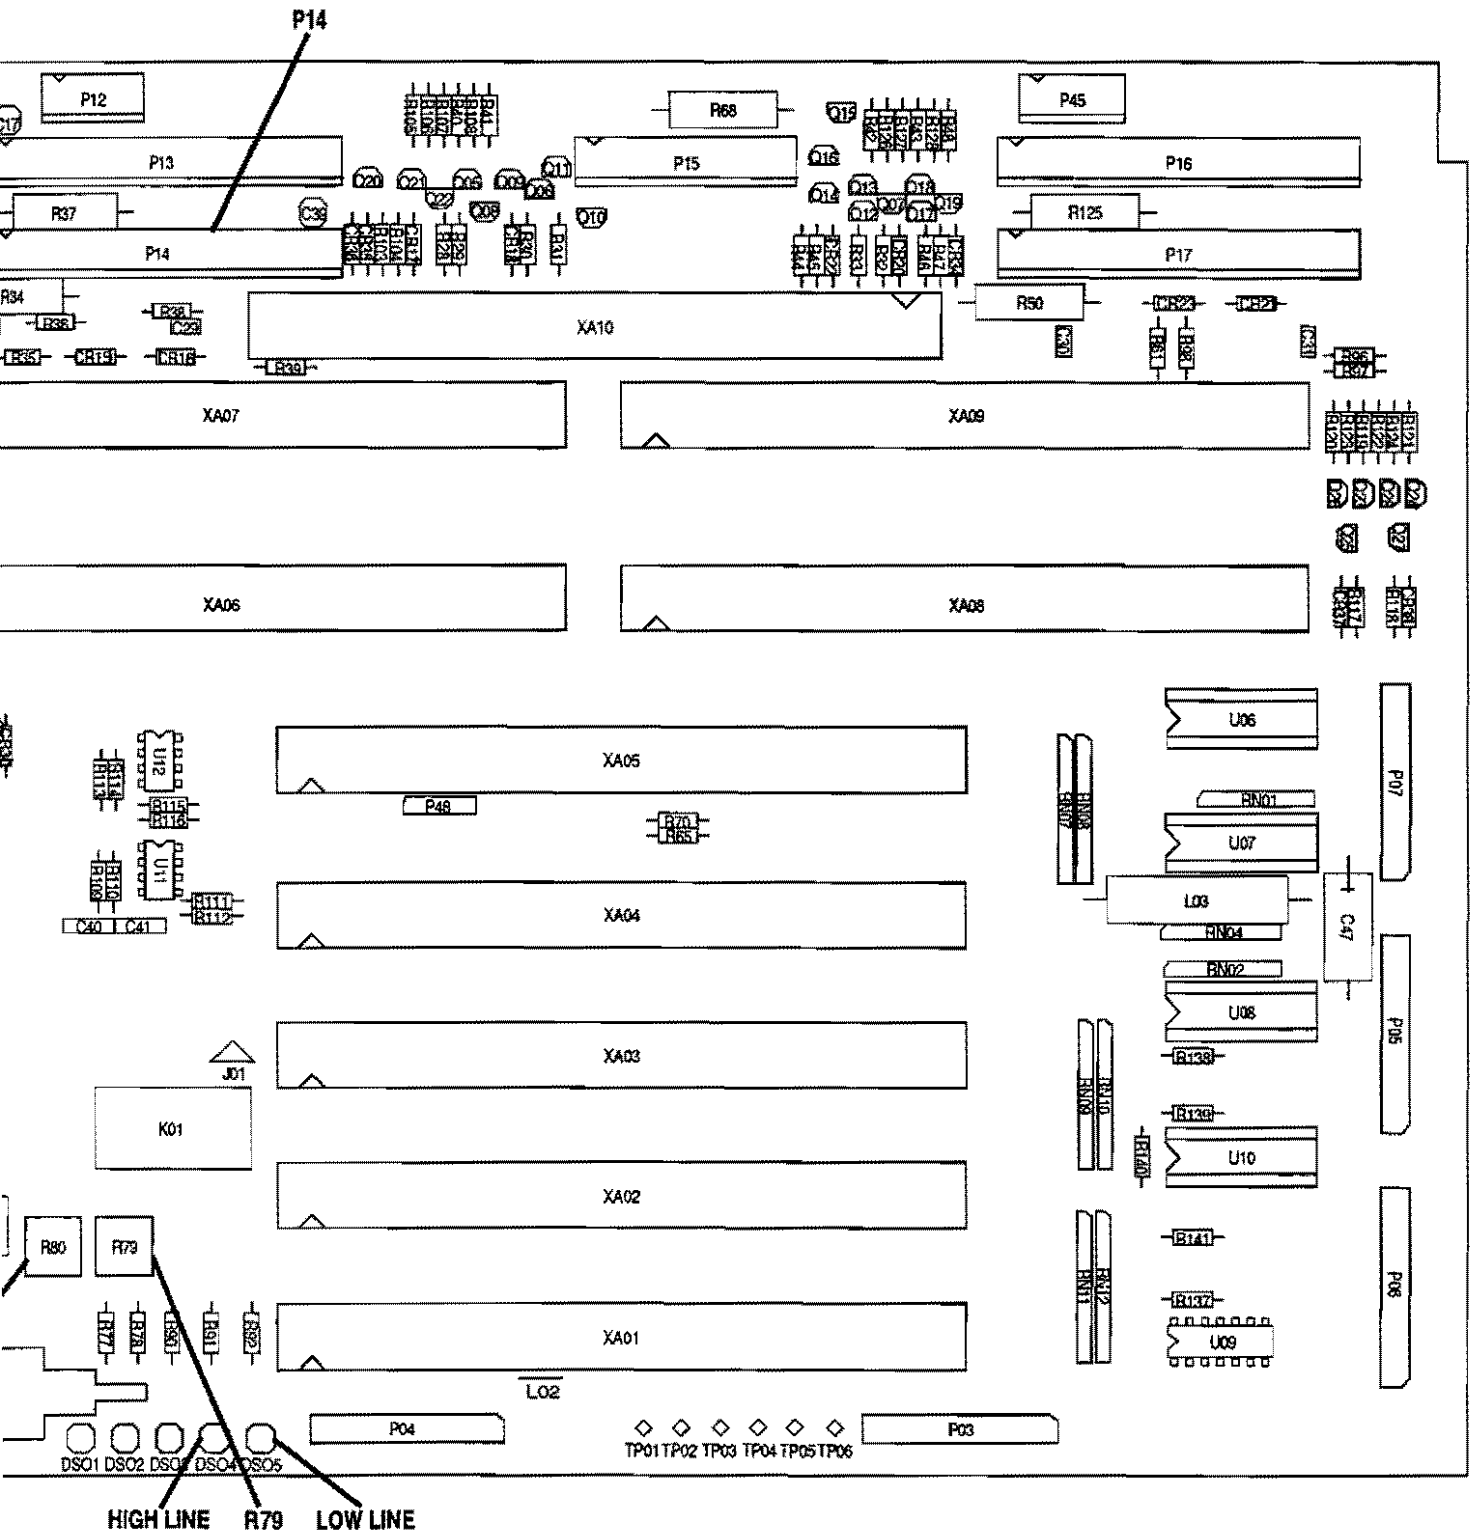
A14 Motherboard PCB, Test Point Connector, Indicator, and Adjustment Locations
